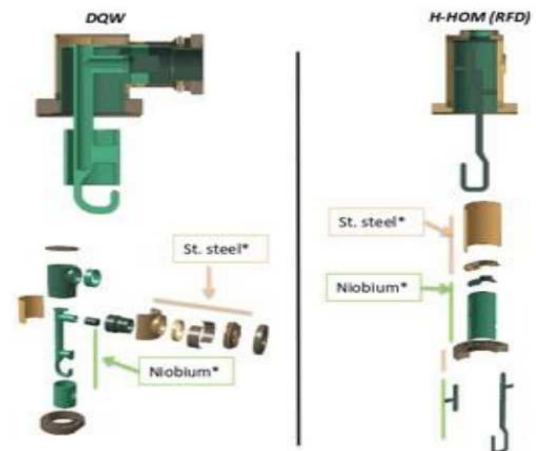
Top: HOM couplers for the DQW and the RFD cavities respectively using a 2-stage filter design (courtesy USLARP & CERN EN-MME).
